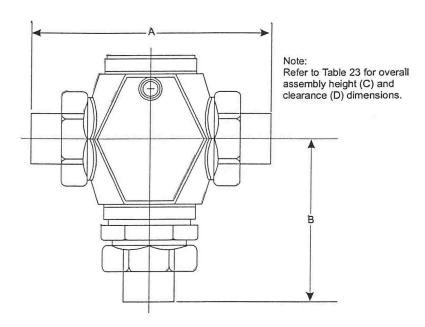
Two-Way and Three-Way Union Sweat Valve Dimensions
